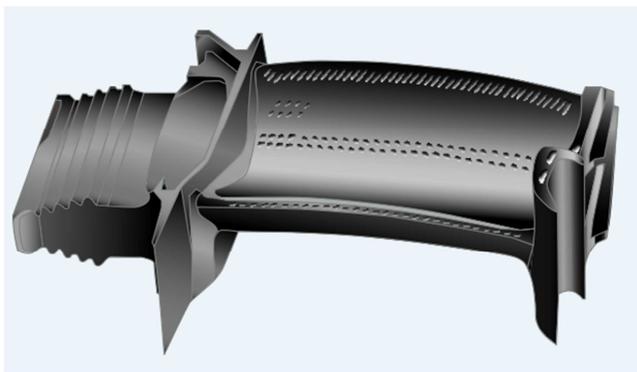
Typical Modern Gas Turbine Jet Engine Blade Showing Perforations on the Leading Edge [24].
